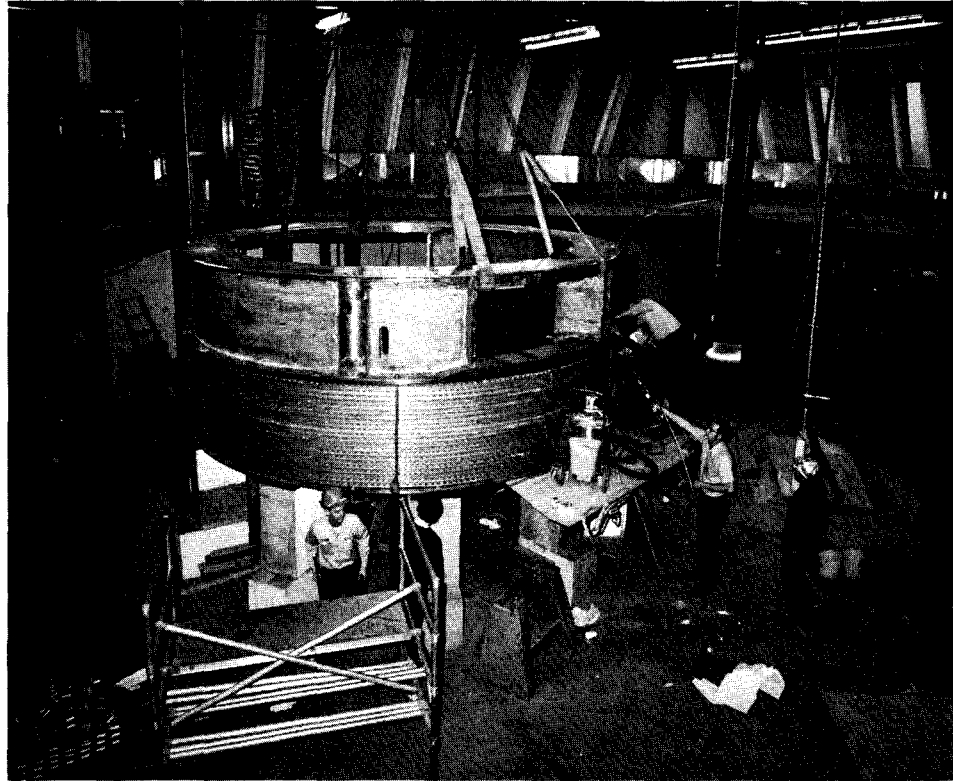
NAL Bubble Chamber Magnet Assembly.
